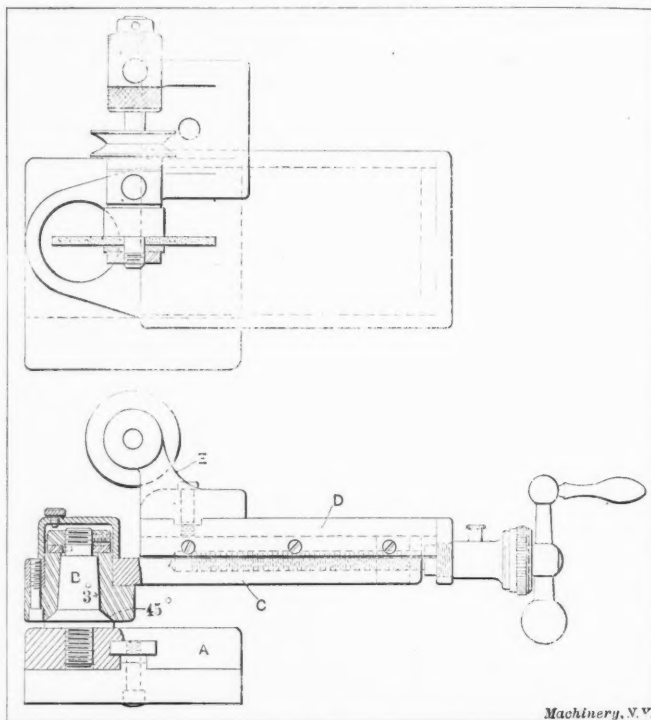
Radial Grinding Fixture used in the Shops of the L. S. Starrett Co.
